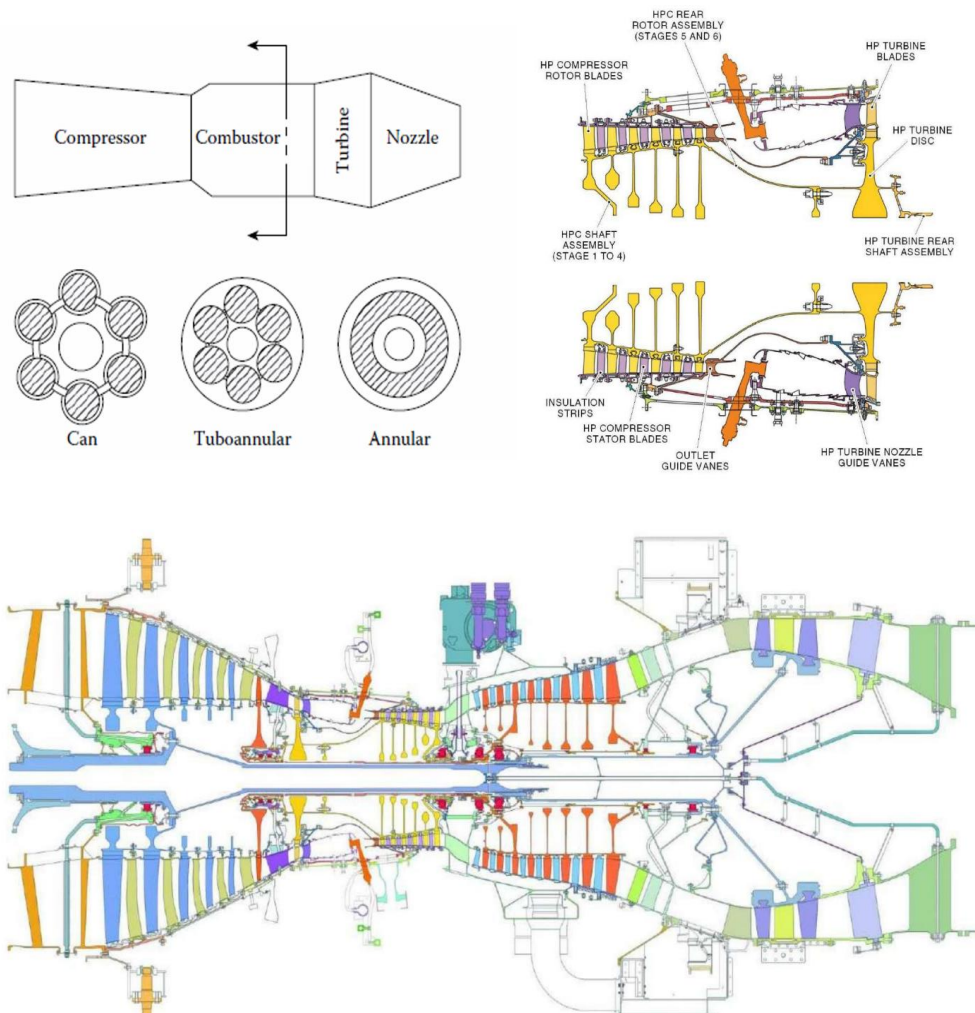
Sectional views showing the detailed geometry of the combustion chamber
